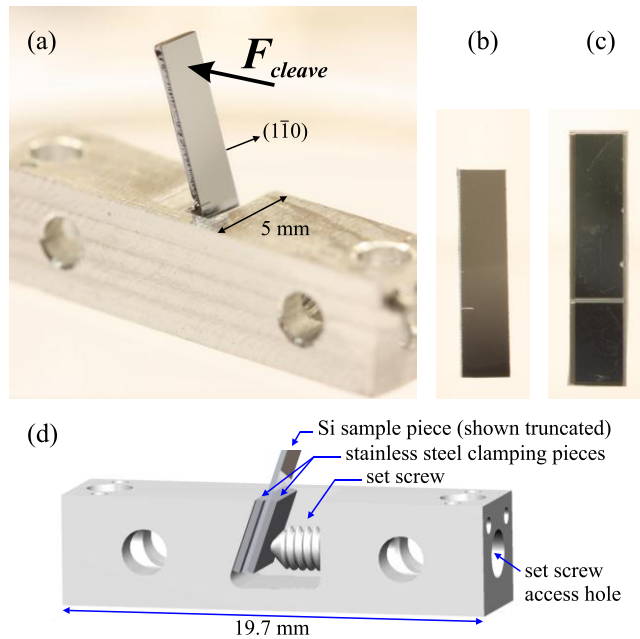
(a) Sample holder and mounted Si sample piece. (b) Si(111) sample piece with small scribed scratch to initiate cleavage. (c) Less successful Si(100) sample piece cut half-way through with diamond saw in an attempt to reduce cleavage force (see text). (d) CAD rendering of the sample holder showing details of the clamping system.
